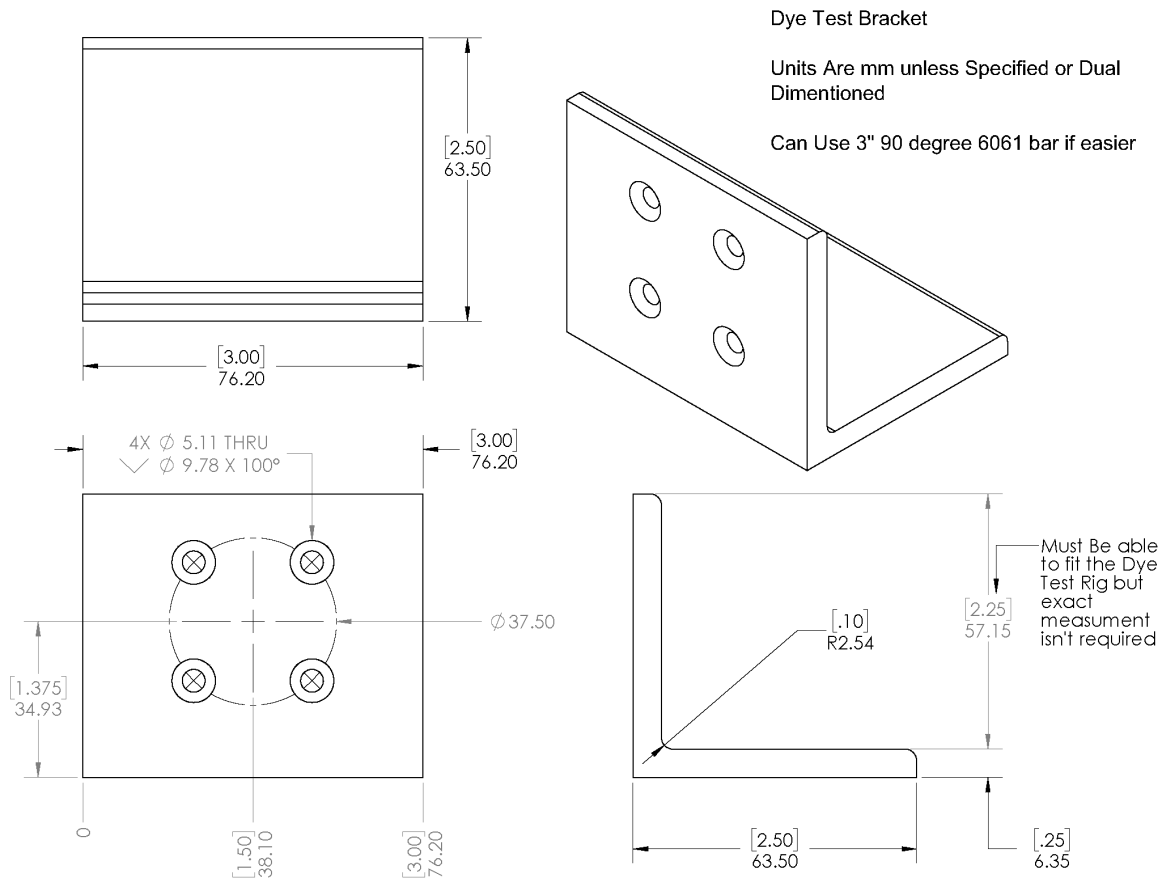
CAD Drawing of the Mounting Bracket for Modified Dye Testing Cell
